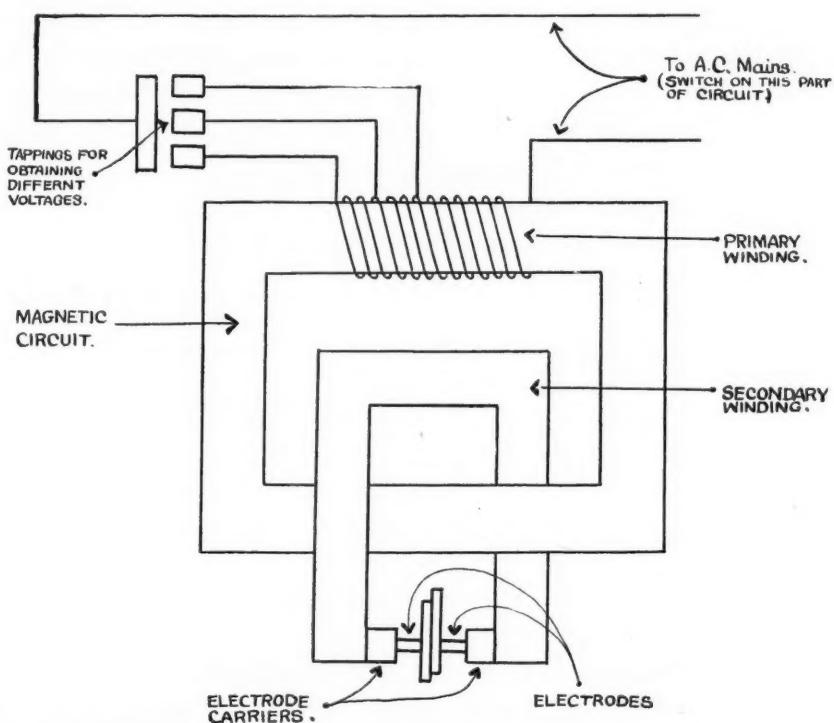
Diagram illustrating electric circuits of welding apparatus. Adapted from Wilson's "Electric Welding."
